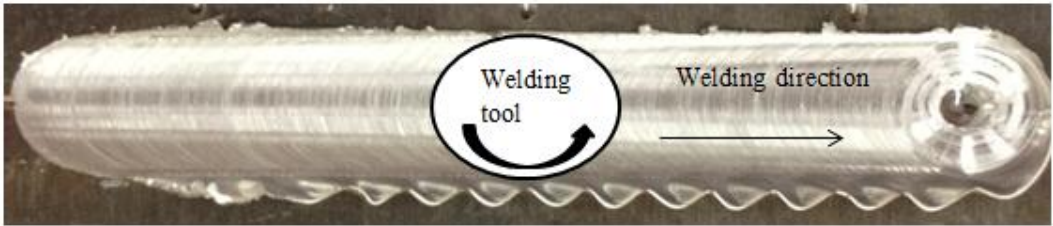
FSP sample showing excess material in advancing side and rotational and welding direction of the tool
